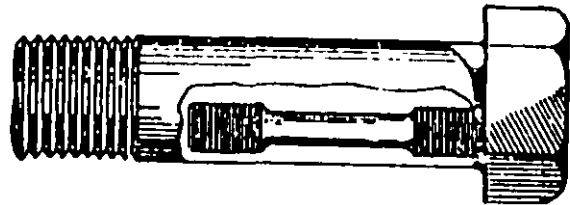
Location of standard, round, 2-inch-gage-length, tension-test specimen when turned from large-size screw.
